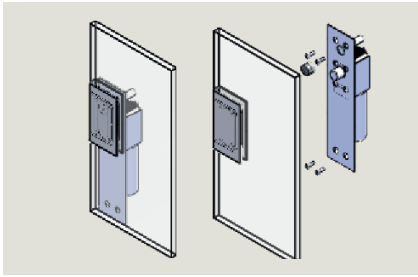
DK3305-02G Electric bolt lock kit w/ glass side lite prep
